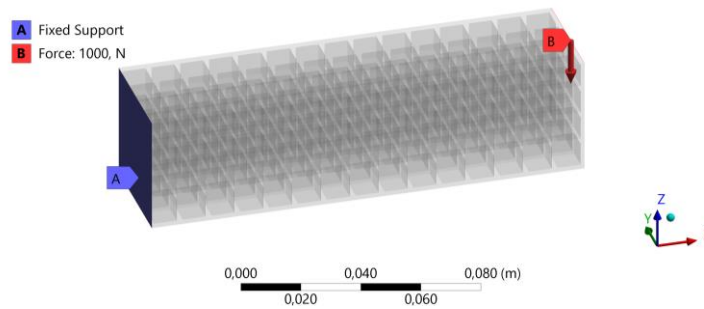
Design diagram of a cantilever beam with cubic cavities
